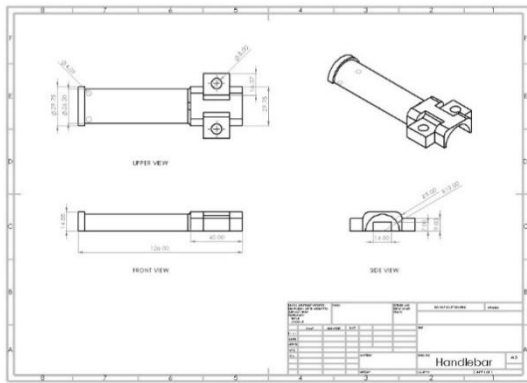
Engineering Drawing of the 3D Printed Handlebar
